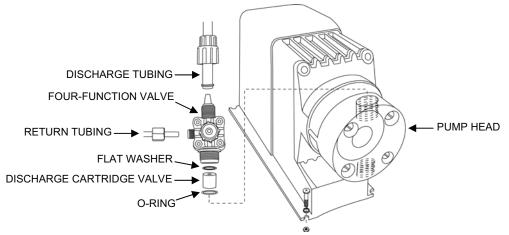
Chemical Injection Pump Discharge Cartridge, O-Ring, and Flat Washer Replacement.
